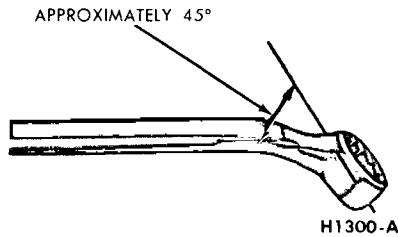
Wrench for Bleeding Brake Hydraulic System
